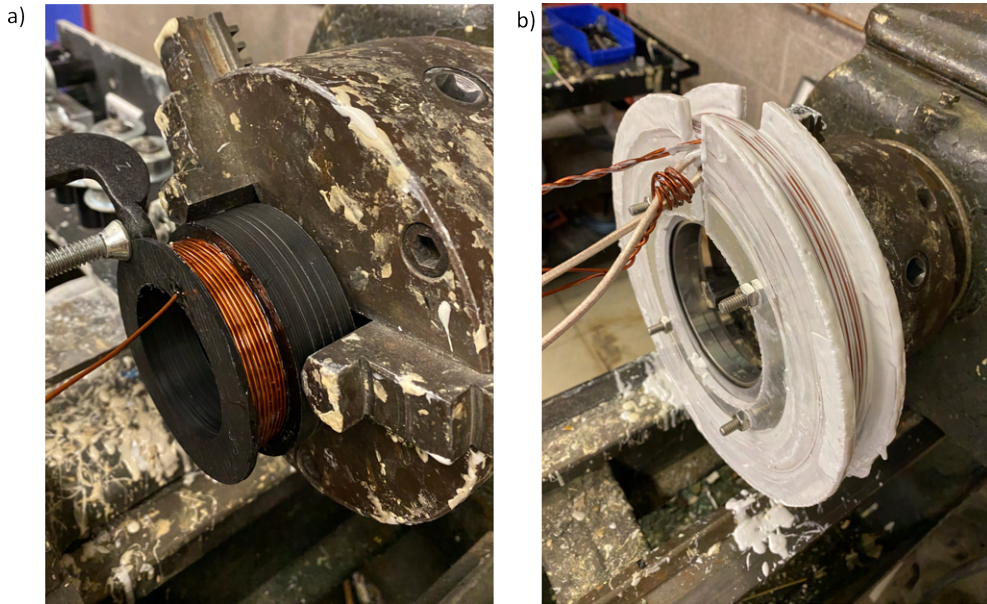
The Photograph a) shows the fabrication of the side coils, and Photograph b) depicts the main gradient coil. The main gradient coil would be square hollow core copper wire insulated by fiberglass. The lathe holds the mold and rotates while the hollow core wire is fed. The coil is fixated using non-magnetic high-temperature two-component epoxy (in white). The side coils a) are wound on a plastic mold with standard magnet wire and glued together with standard high-temperature epoxy.
